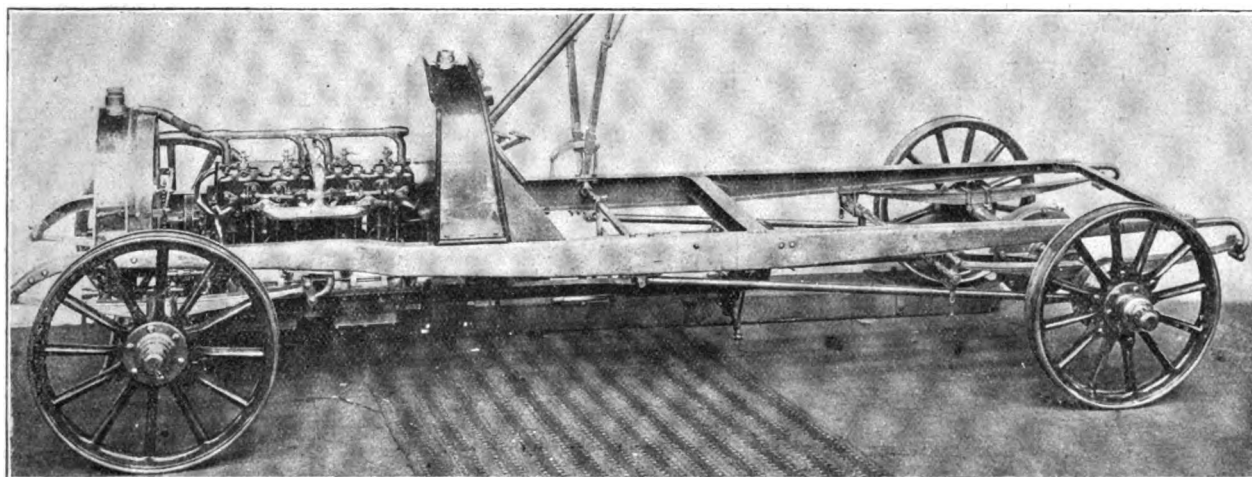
Chassis of "S.P.Q.R." 26-30-h.p. Car.
